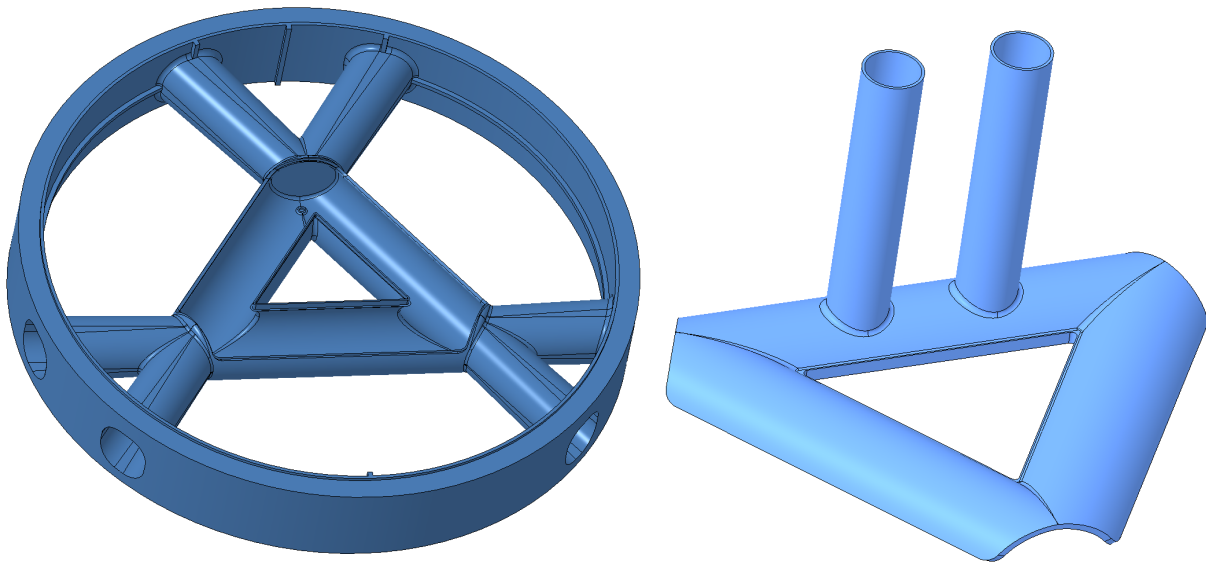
Tube Vacuum Vessel Body and cap machined from Al 6061-T6 forgings
